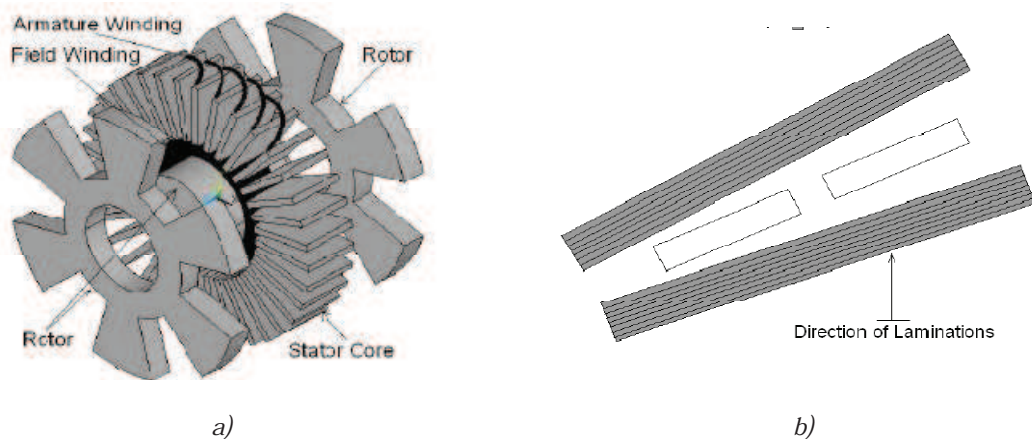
Switching reluctance axial machine [34] a) whole machine and b) detail of a stator pole
